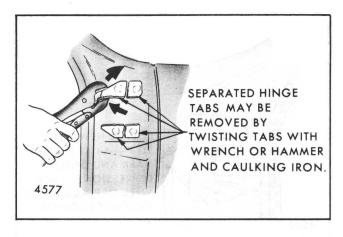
Body Side Hinge Strap Removal - "X" Styles
